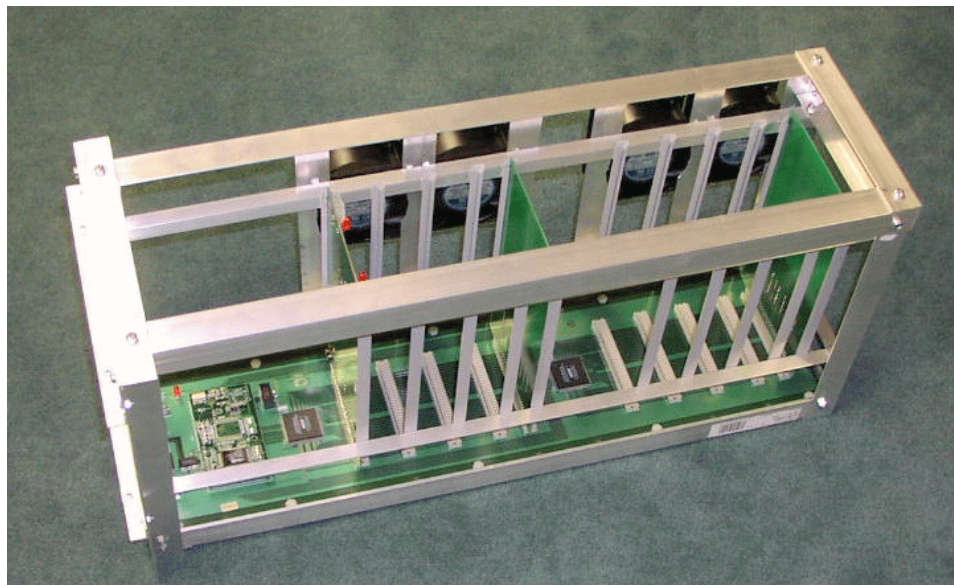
Main test fixture showing the mother board, card slots, Z-World computer, Altera bus controllers and cooling fans.
